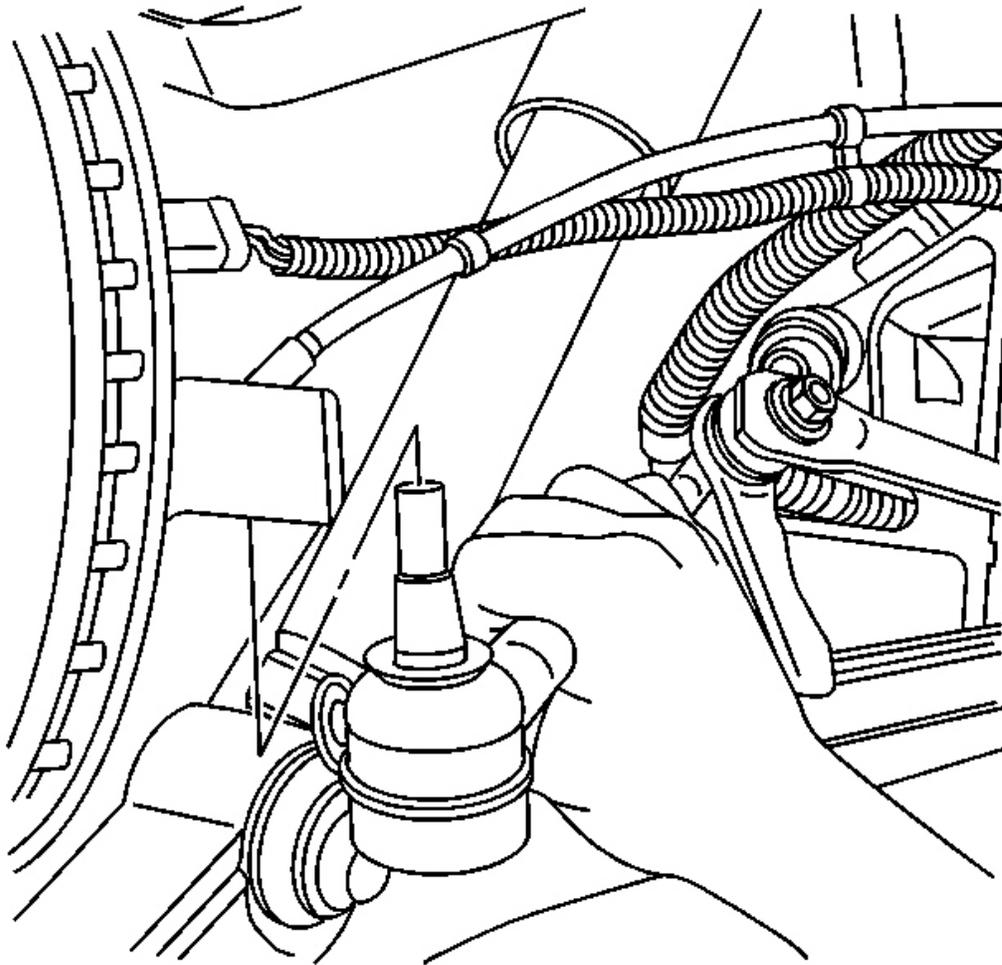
View Of Outer Tie Rod End At The Suspension Knuckle
